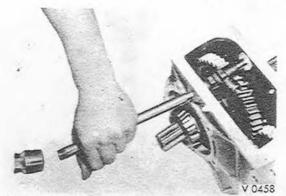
Removing the high & low fork shaft from the transfer case.
